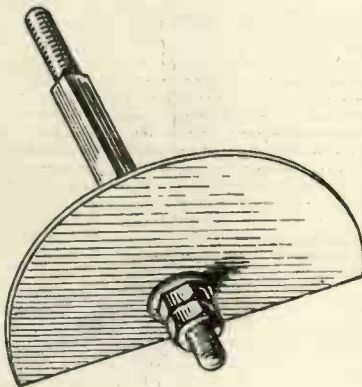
Method of assembling the moving vanes upon a square centre spindle.
